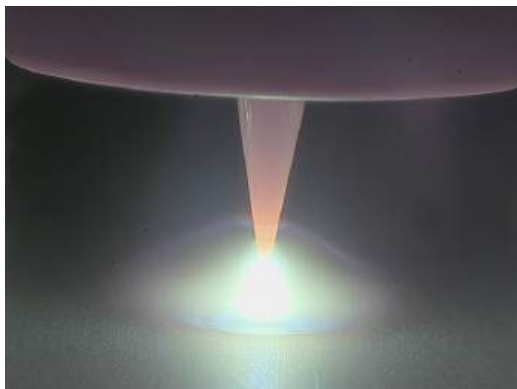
Detailed view of the tungsten electrode and arc plasma during TIG welding with argon as the shielding gas.
